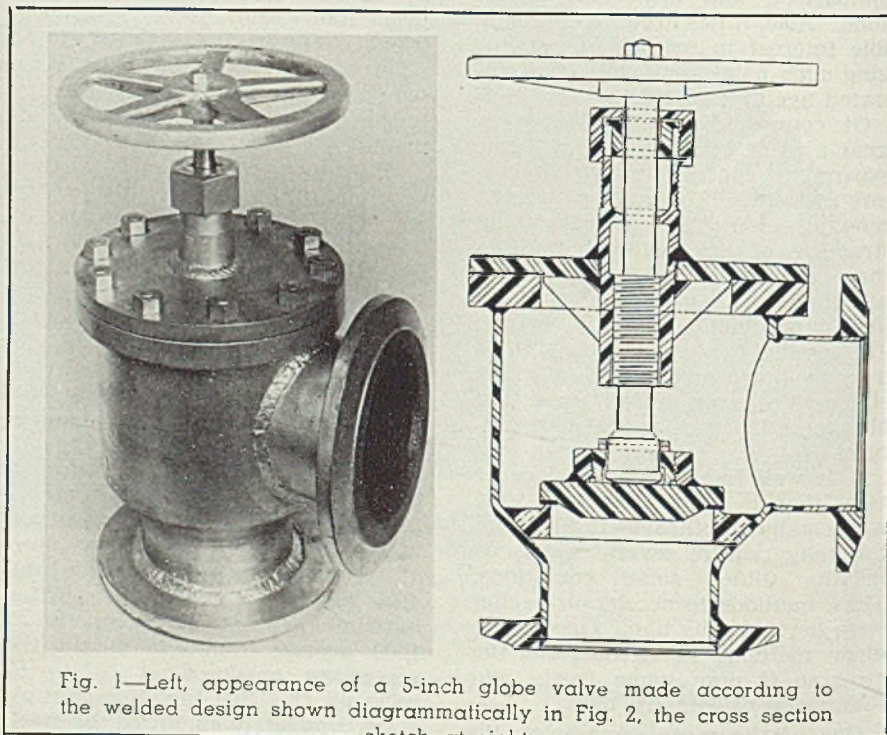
Left, appearance of a 5-inch globe valve made according to the welded design shown diagrammatically in Fig. 2, the cross section sketch at right
